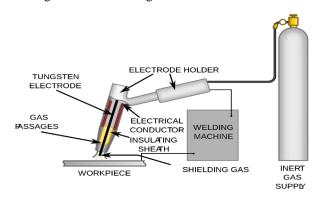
Diagram of TIG Welding Equipment [8]
